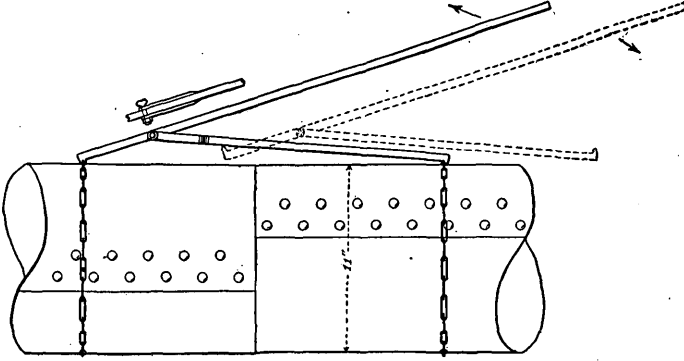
Pipe wrench for setting and unsetting hydraulic pipe.
